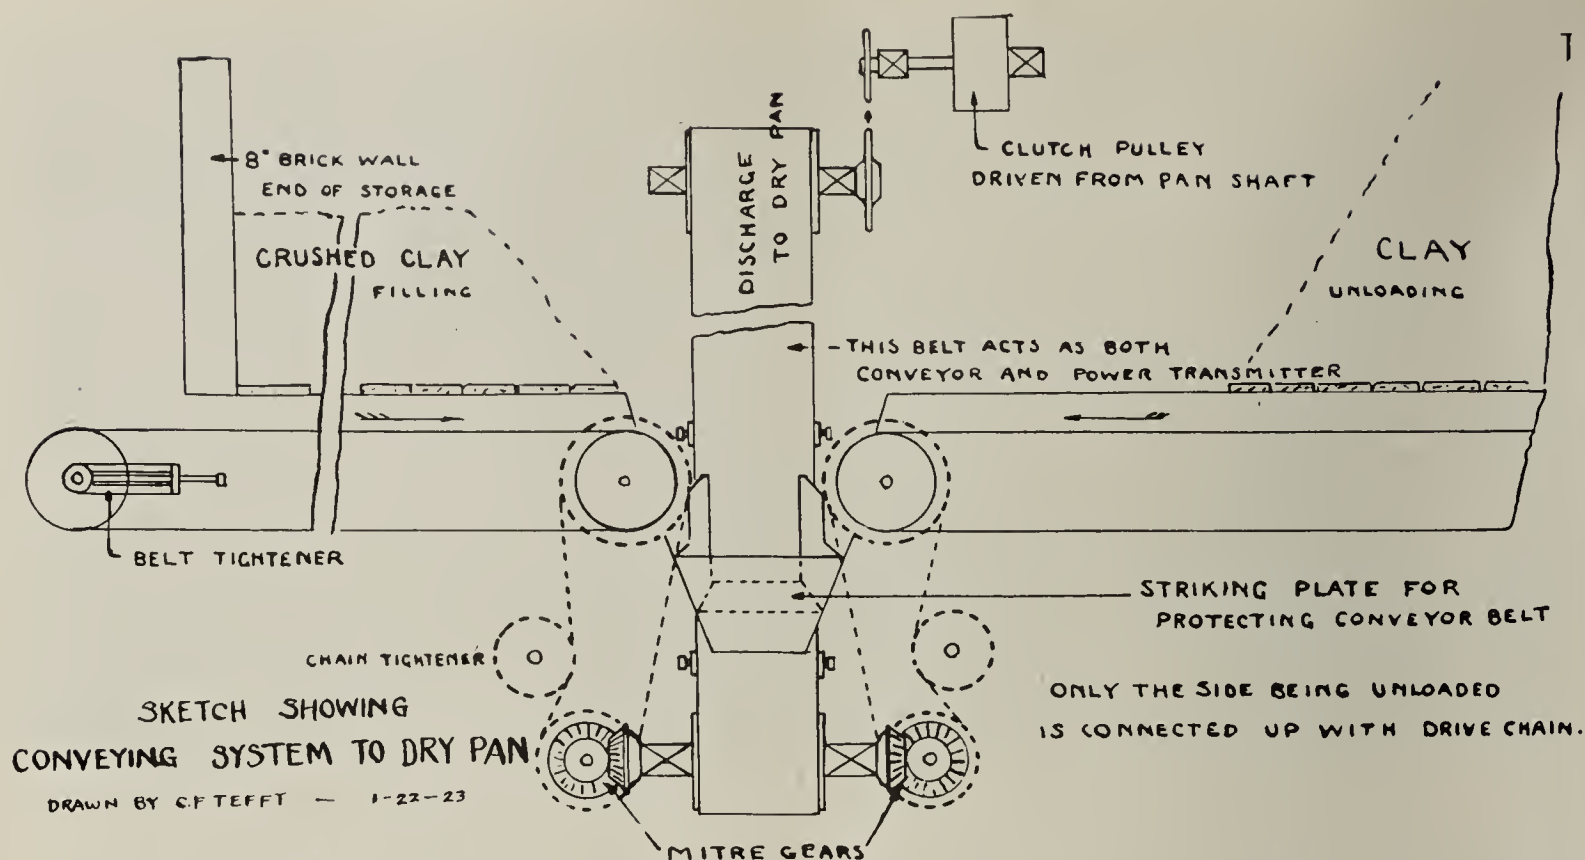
Sketch Showing the Unusual Arrangement of Conveying System to Dry Pan. All of This Conveying Equipment Is Driven from Pan Shaft. The Tail Shaft of Conveying Belt Is Extended Beyond the Bearings Just Far Enough to Take Mitre Gears Which Mesh with Other Gears on Short Jack Shafts. These Short Shafts Are Parallel to Shafts Carrying Head Pulleys of Horizontal Conveyors and Are Connected with Them by Sprocket and Chains
